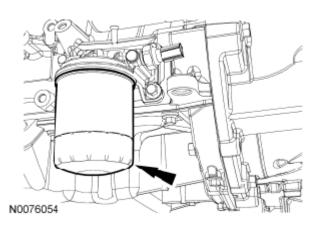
Locating Engine Oil Filter Courtesy of FORD MOTOR CO.
